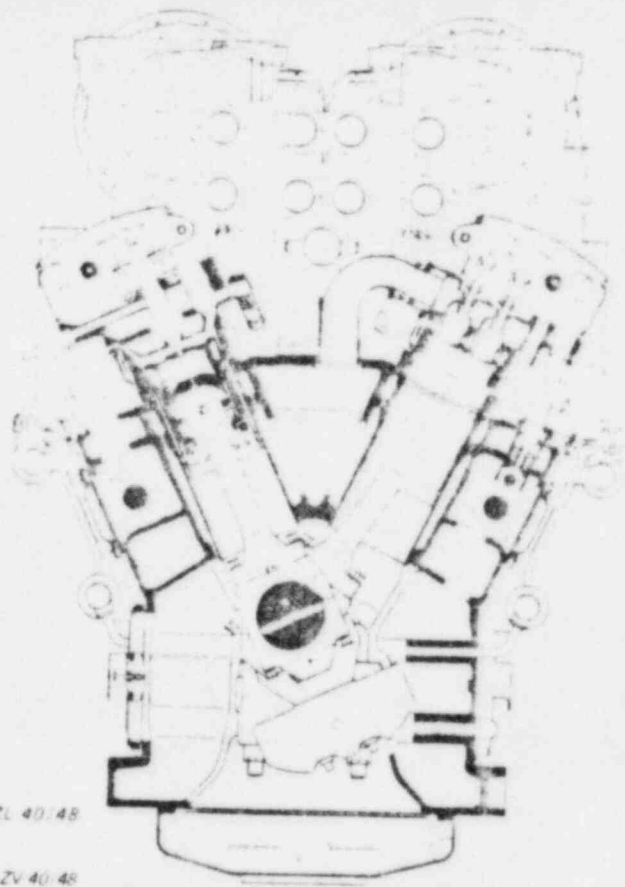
(Right): Cross-section of ZV 40/48 engine.
